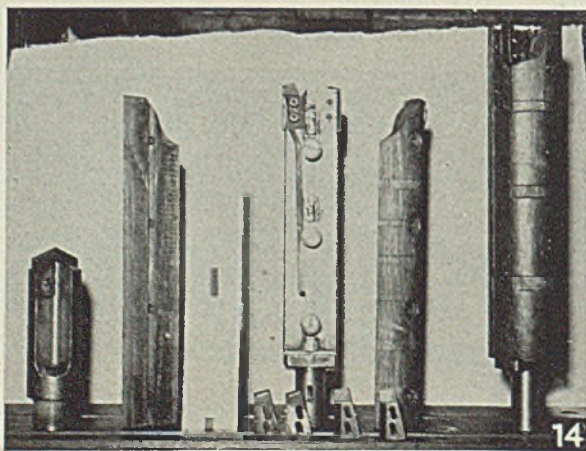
Tools for boring and reaming gun forgings. The diamond pointed drill at extreme left drills the hole from the solid forging. The bit with the rock maple "packing" shown assembled at extreme right and disassembled in center is used to open up or "ream" the bore. This tool employs cutters of high speed steel, guided straight through the forging by the maple packing
